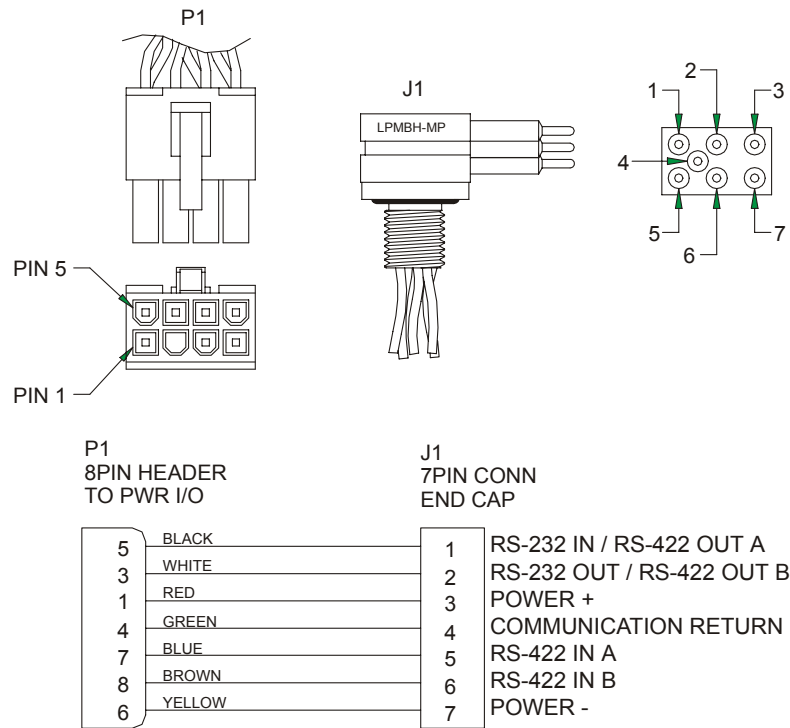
Internal I/O Cable (End-Cap to PIO Board) Wiring
